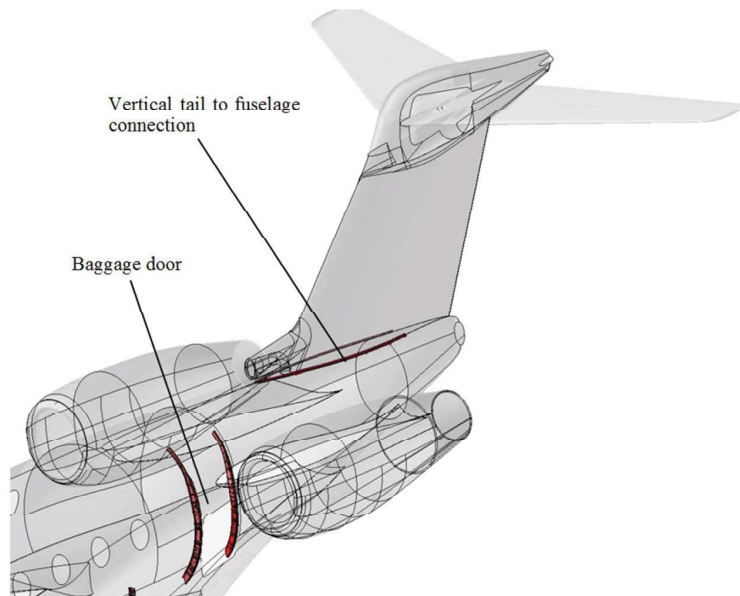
Cracked elements at the Baggage door surrounding and empennage
